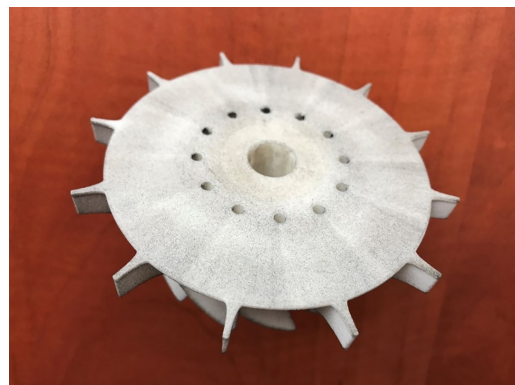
The radial contamination on the prototype impeller equipped with 3 mm recirculating holes
